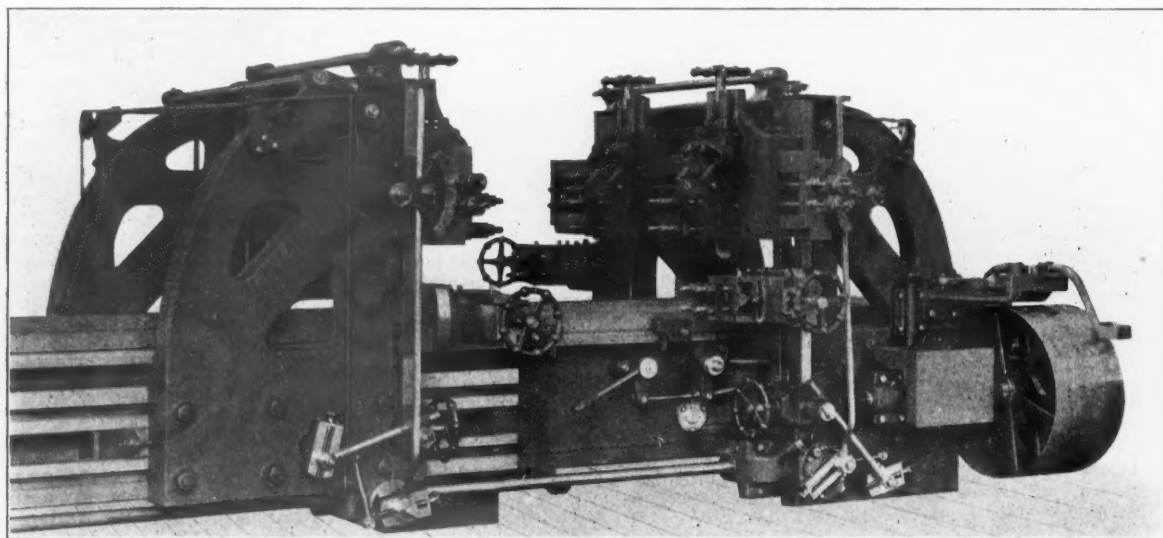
The Woodward & Powell Locomotive Connecting Rod Planer.
